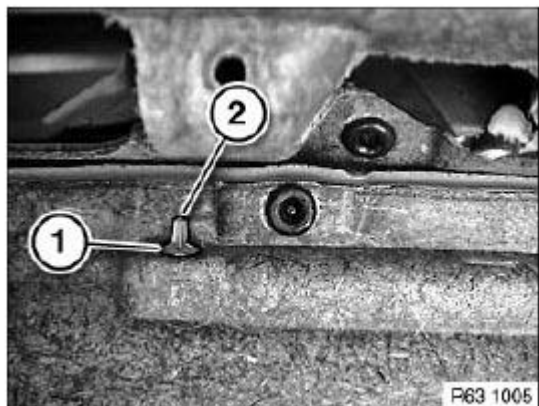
Identifying Spring Washer And Fibre Optic Cable
